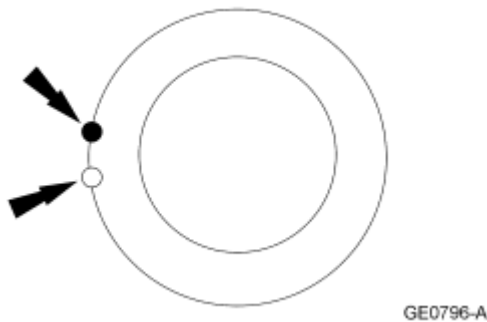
Finding Excessive Driveshaft Runout (1 Of 2)
